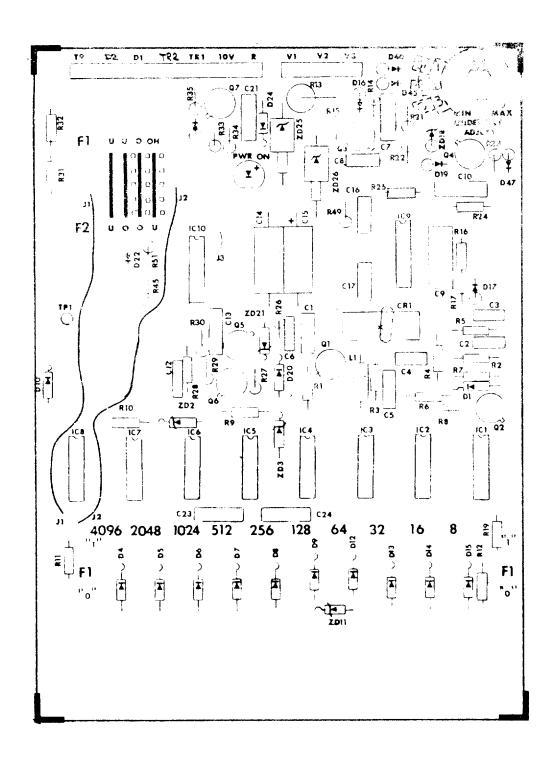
(0273A9590 Sh. 3 -1) Frequency Board Assembly
